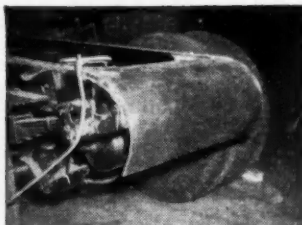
Adds Bumper Guard. $\frac{1}{4}$ " plate is rolled and welded to truck frame channel. Protects air tank from accidental damage when backing.
